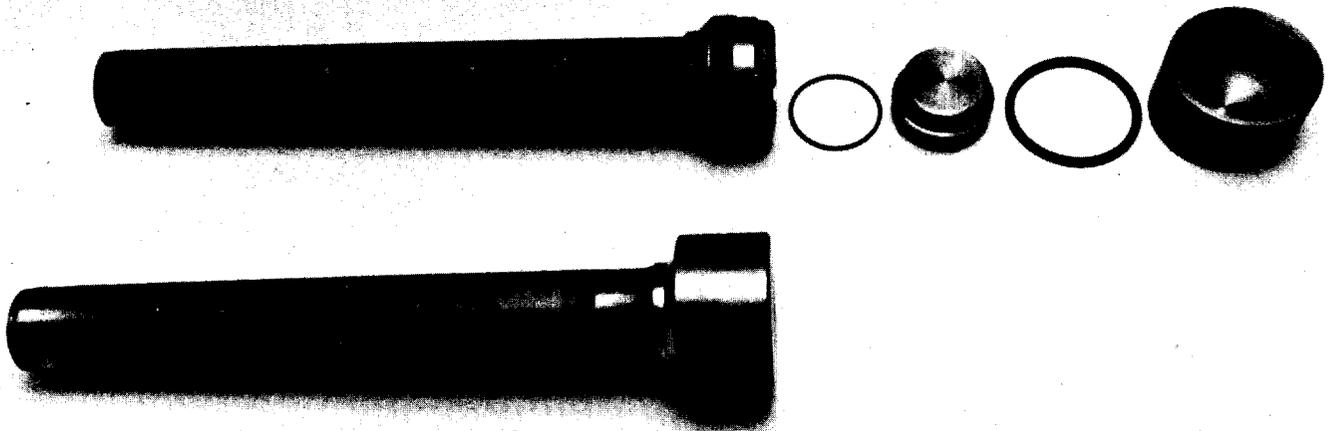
SECONDARY CONTAINER; EXPLODED VIEW AT TOP. Overall length, approximately 16.5".
